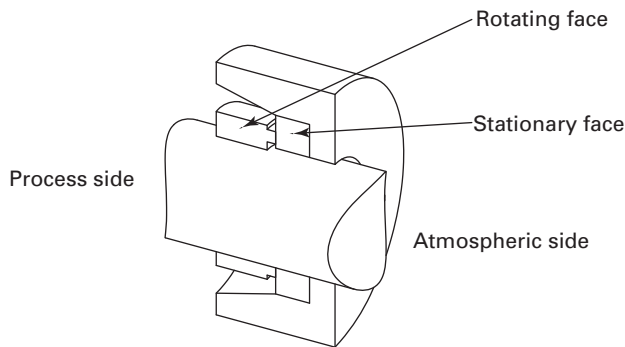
Single Mechanical SealSG-2.3.2 Mechanical SealsSG-2.3.2.1 General
